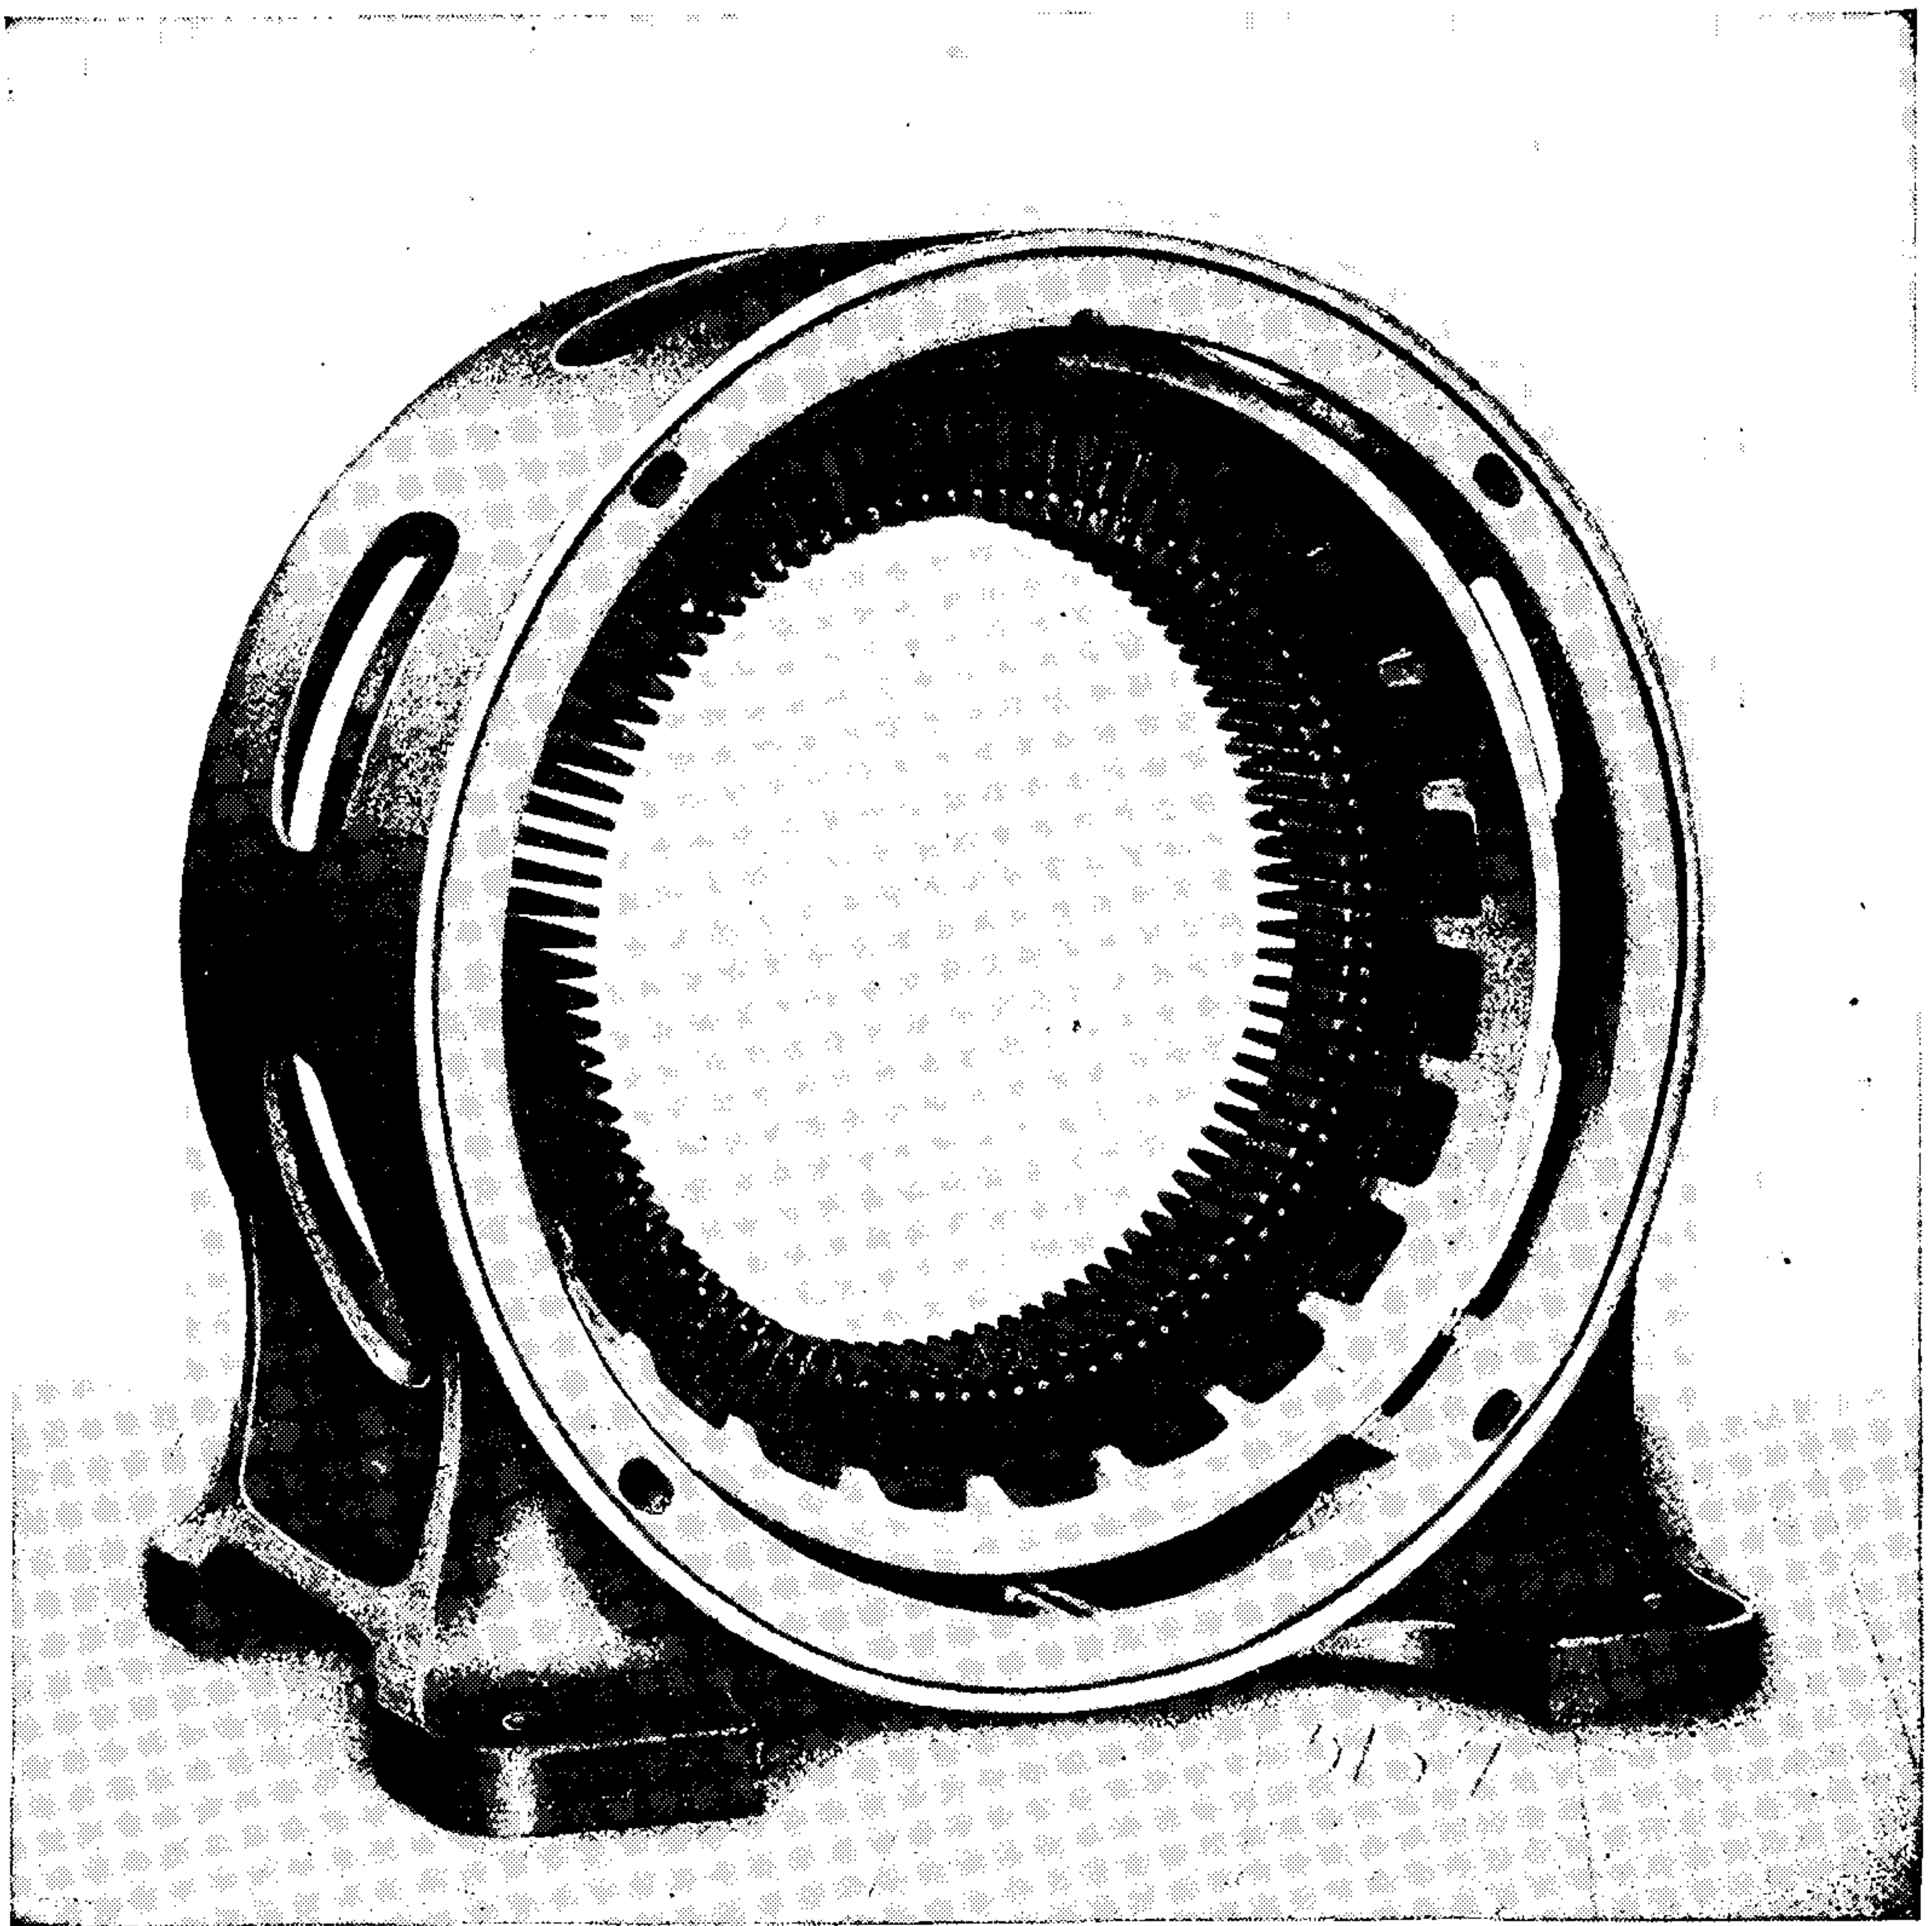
Assembled Stator Core and Housings of Form Q Induction Motor
